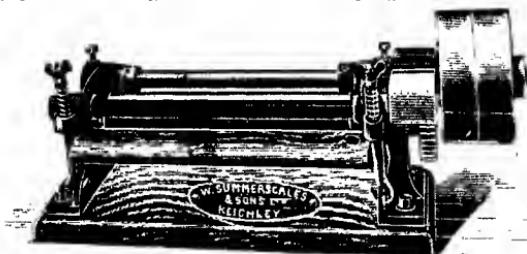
“ROLLER” COLLAR SHAPING MACHINE.
